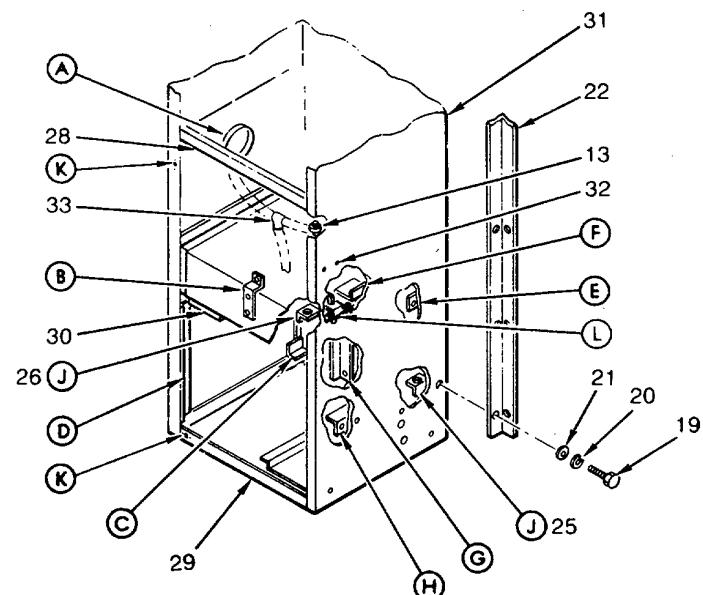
Chassis (Lower) (Sheet 1 of 2)
